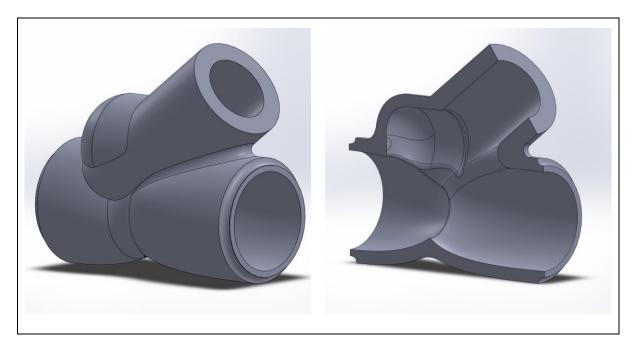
Valve D - Y Pattern Globe Body Design.
